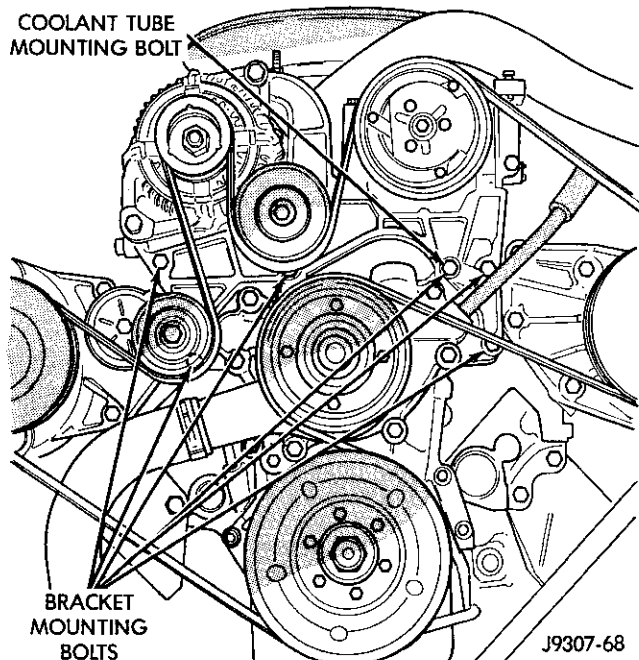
Bracket Bolts—5.9L HDC-Gas Engine
